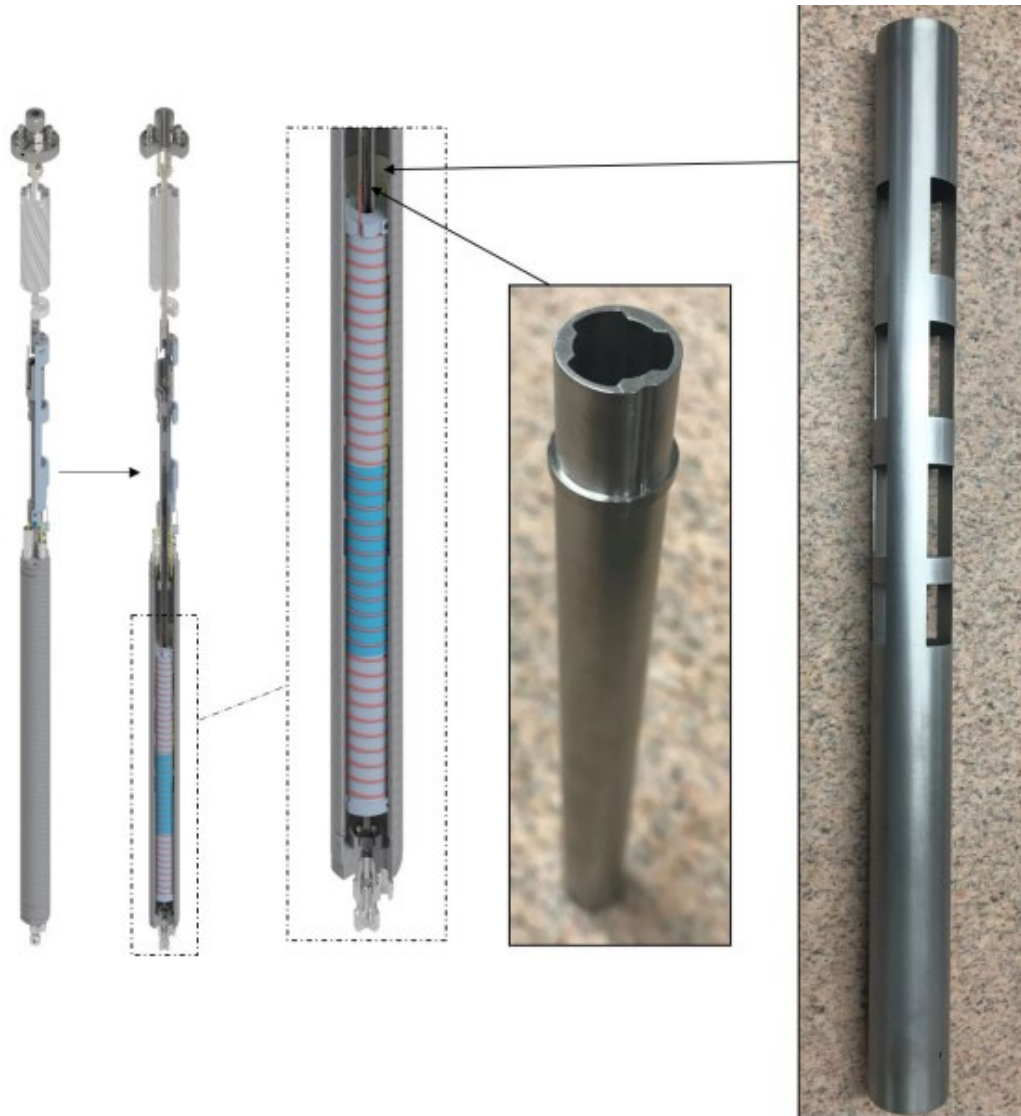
Fabricated short capsule well and long heat sing sleeve and pictorial description in the THOR assembly.
